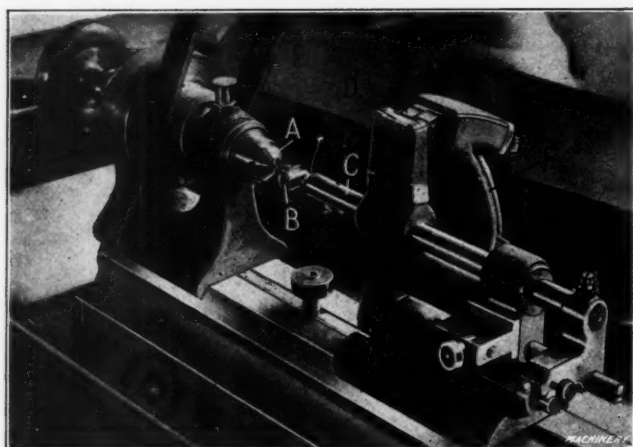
Jewel "Letting-in" Machine and Caliper Rest for governing Diameter of Hole for Jewel
